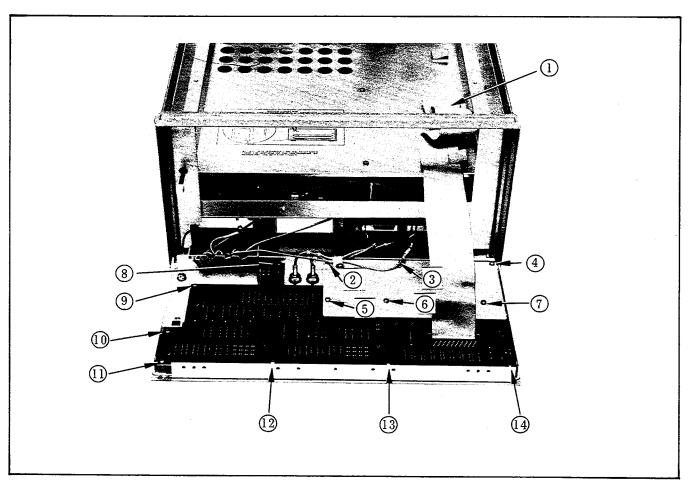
A5 Display and Keyboard Control Board Disassembly.
